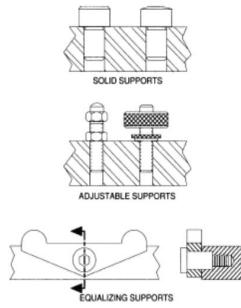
Solid, adjustable, and equalizing supports locate a workpiece from a flat surface.
